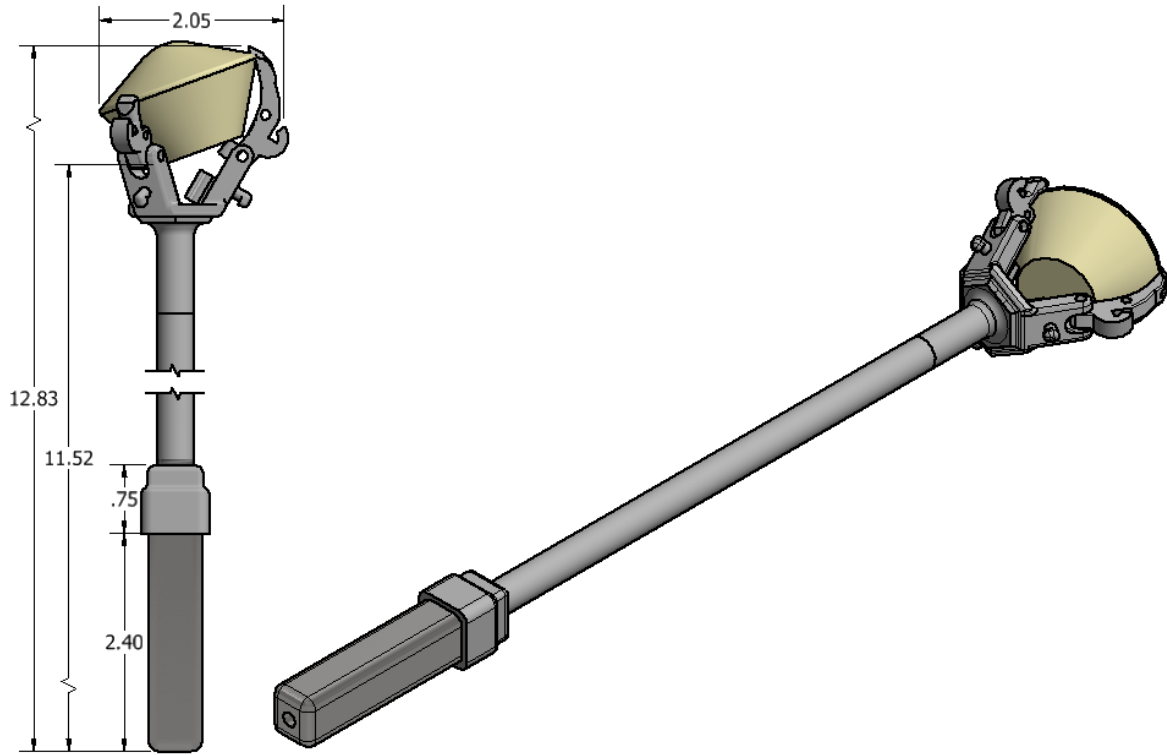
Schematic of assembly of Mark 1 grabber. Dimensions in inches.
